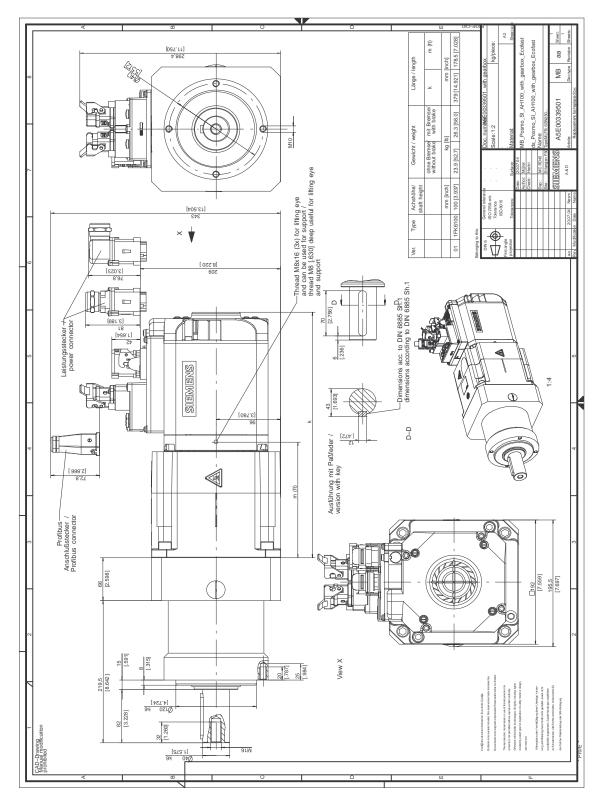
Dimension drawing POSMO SI 6SN2500–2CF□0–1G□□ with gearbox LP155–M01
